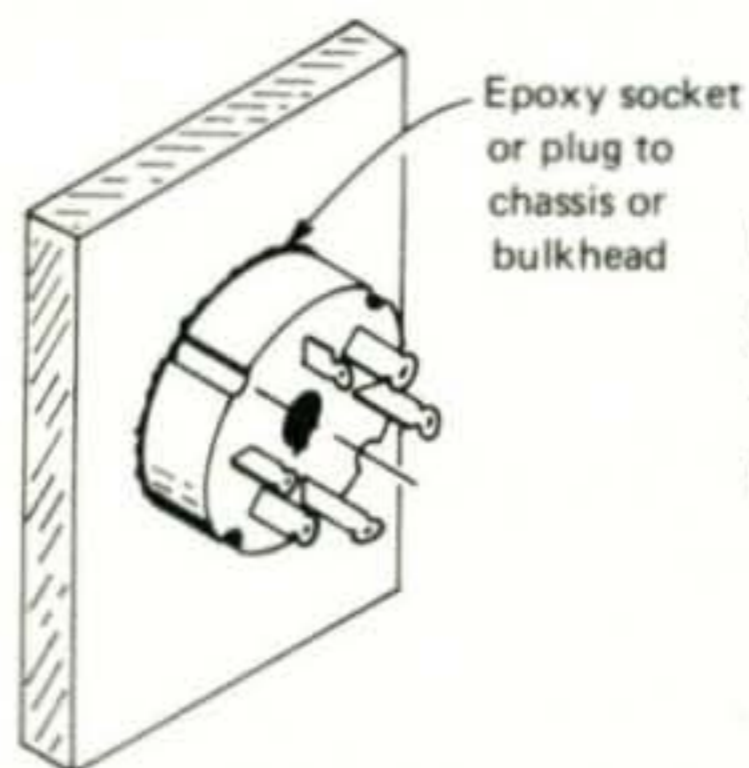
Mounting socket or male plug where bulk-head is too thick for standard socket mounting.
